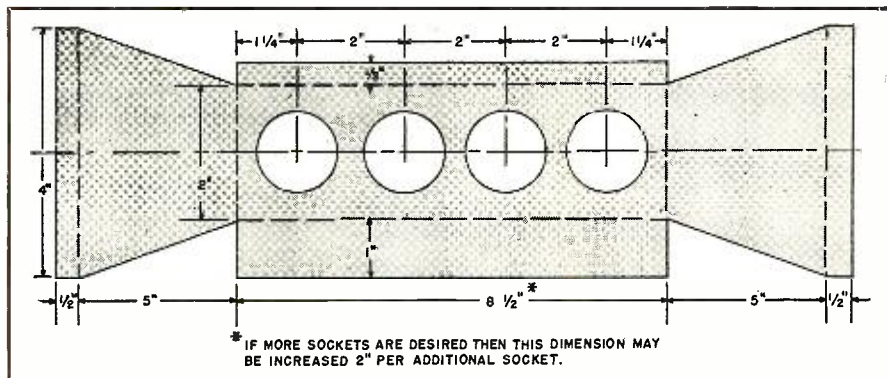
Metal blanking of a 4 tube development chassis. It is similar to the completed unit shown in Fig. 4, provisions for a power supply being omitted.
